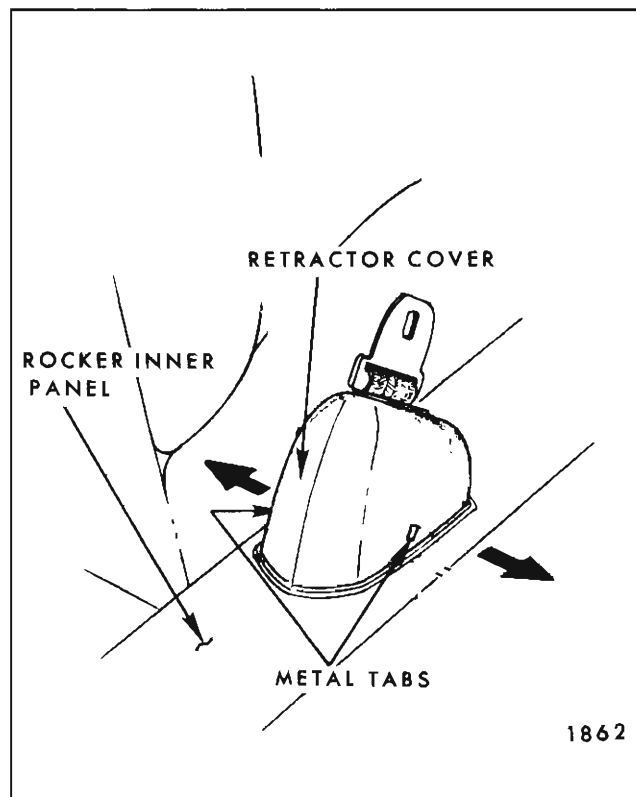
H41—Removal of Seat Belt Retractor Cover -
